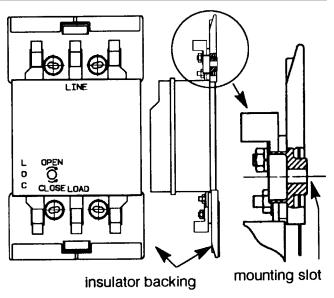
Required insulator bushings and backing insulators for RC Switches mounted on subpanels.
